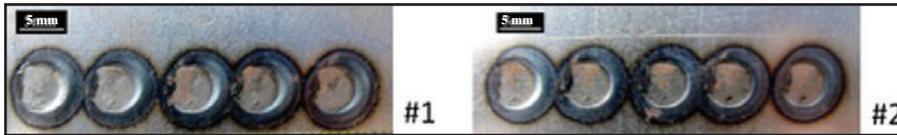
Typical welded specimens of 1.5-mm bare mild steel sheets with 8-mm weld spacing. A — Welds made with the original bare surfaces (weld specimen #1 in Table 4); B — those made using a plastic film as insert (weld specimen #2 in Table 4). The welding sequence is from left to right.
